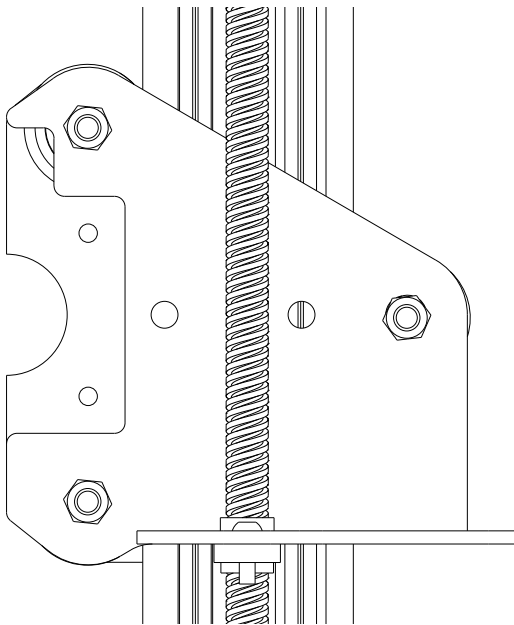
Modified Three-Wheel Aluminum Extrusion Roller Assembly Driven by a Lead Screw
